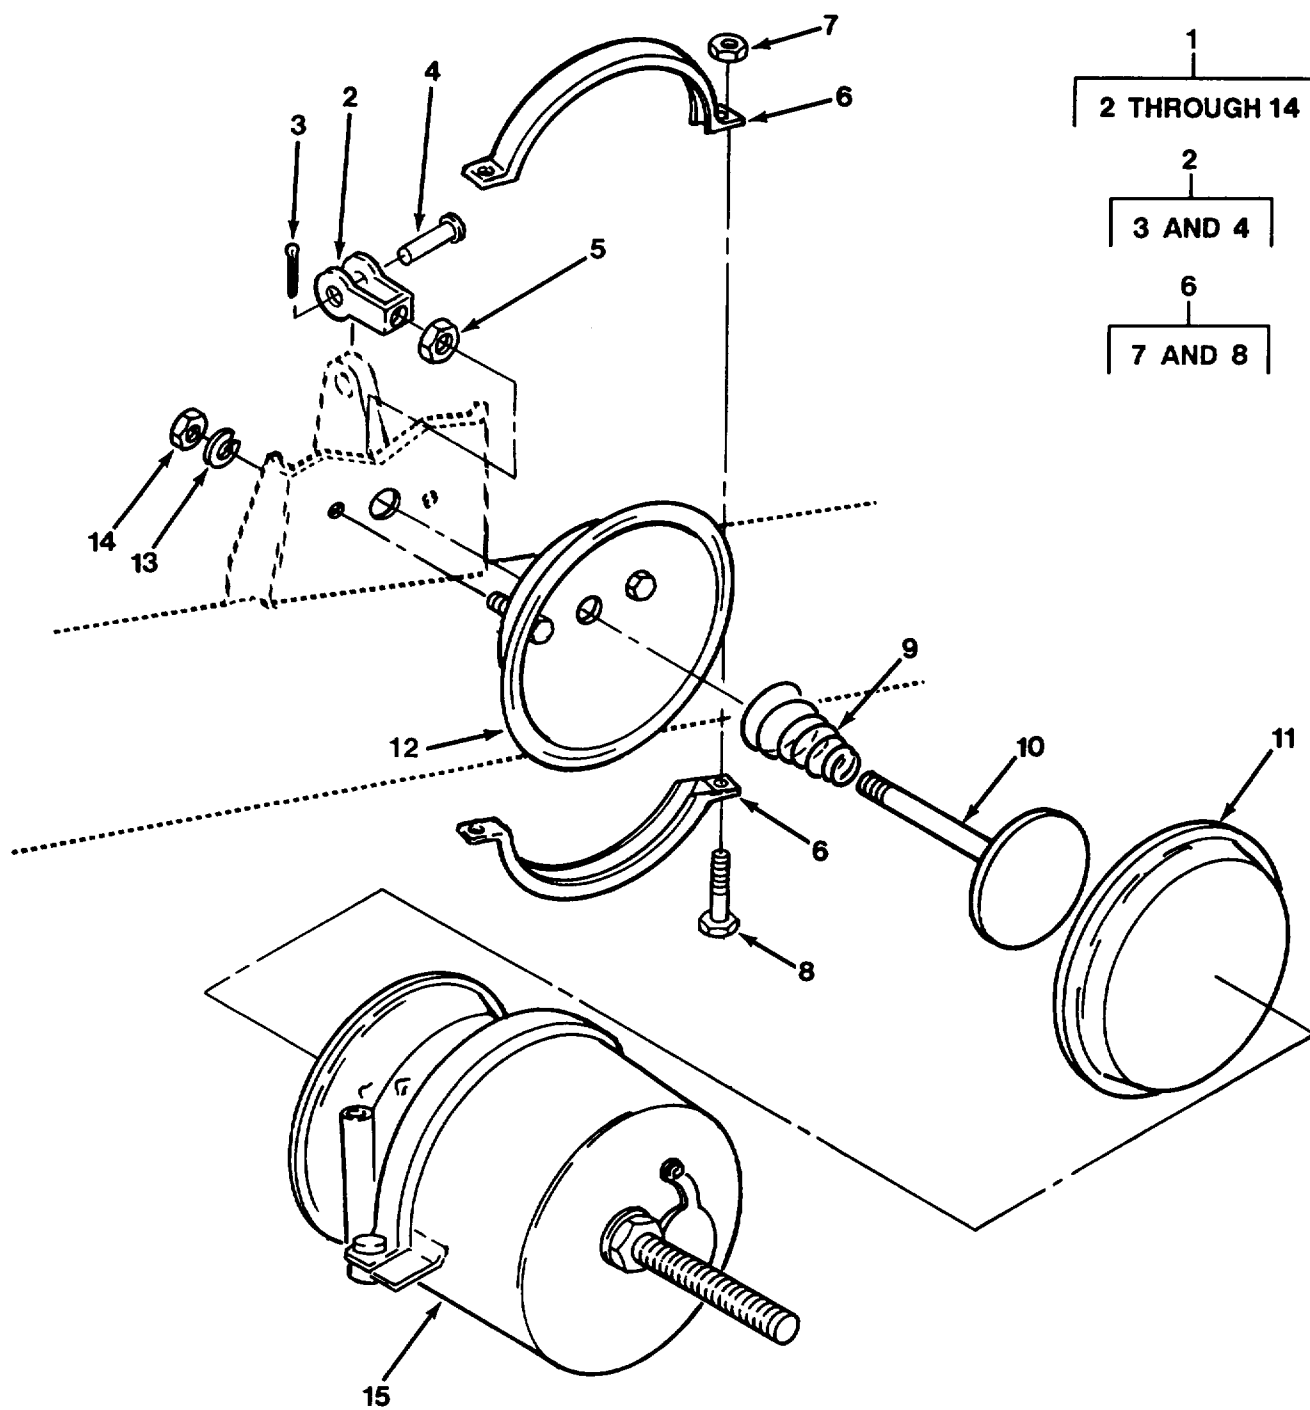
AIR BRAKE CHAMBER ASSEMBLY
